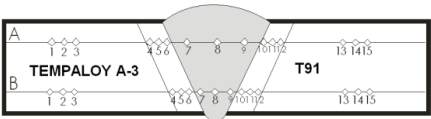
Arrangement of hardness measurement points in the welded tested joints
